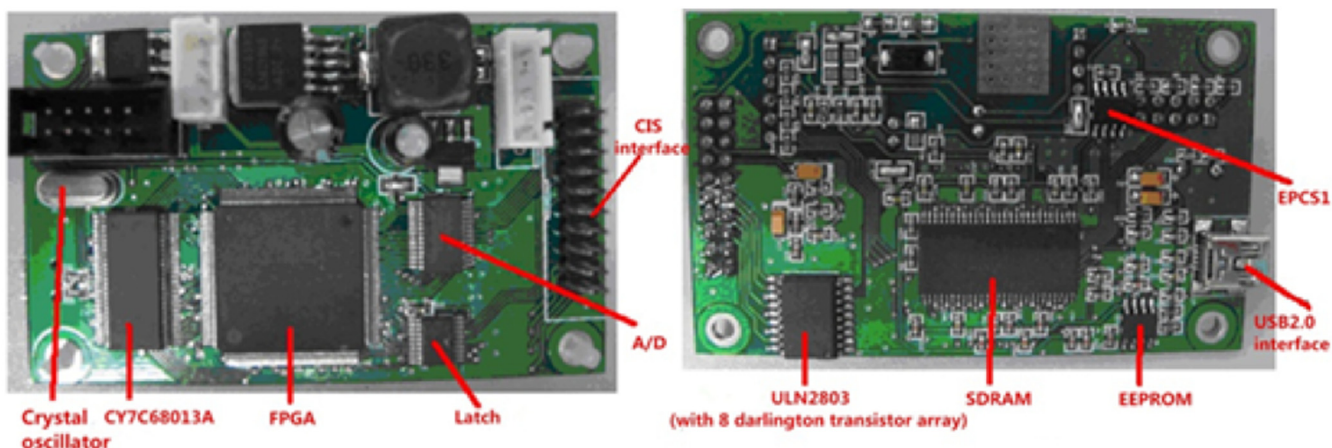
Pictures of (a) the front side and (b) the back side of the PCB.
